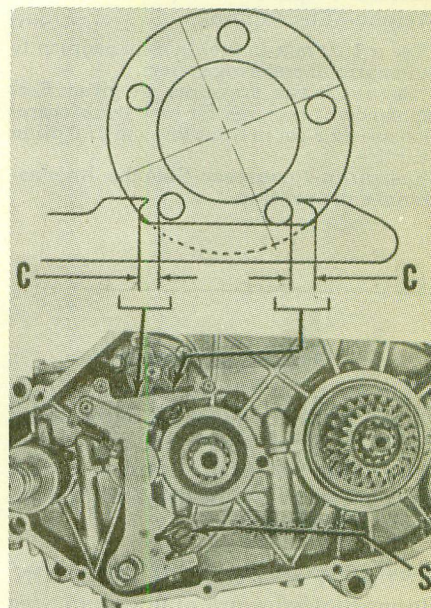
Turn the eccentric screw (S) until clearance (C) is the same on each side of shift drum pins.
